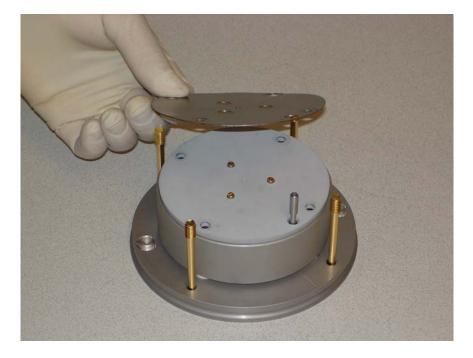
Remove the Cooling Plate Side Thermal Transfer Sheet. 6. Remove the thermal transfer plate and sheet from the anode.
